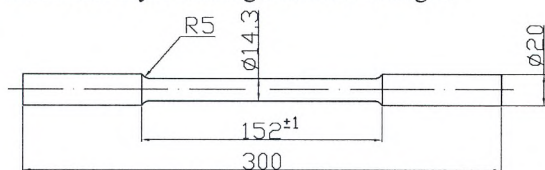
Dimensions and form of samples for traction trial (tolerance of unindicated dimensions - 0,1mm)
